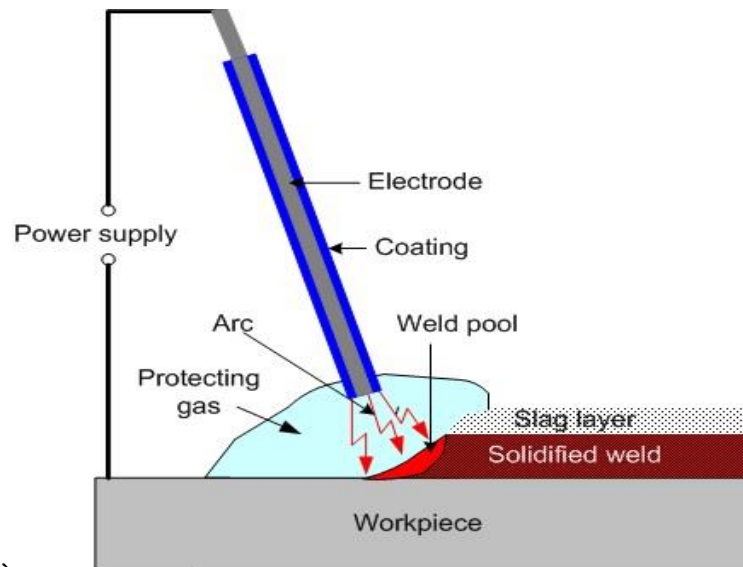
Shielded Metal Arc welding (SMAW)
